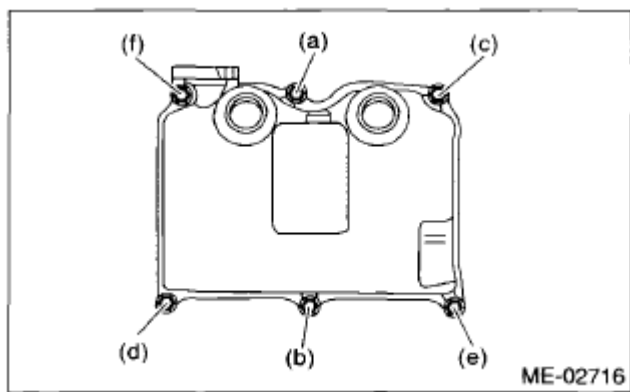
Identifying Rocker Cover Bolts - LH Side Tightening Sequence
